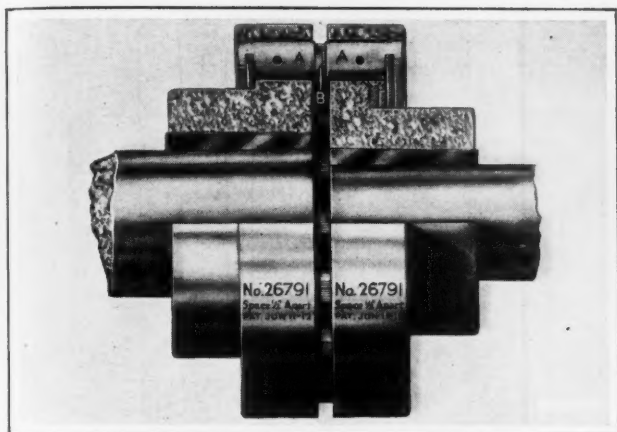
Coupling with Axially Aligned Laminated Springs which engage Perforated Flanges
